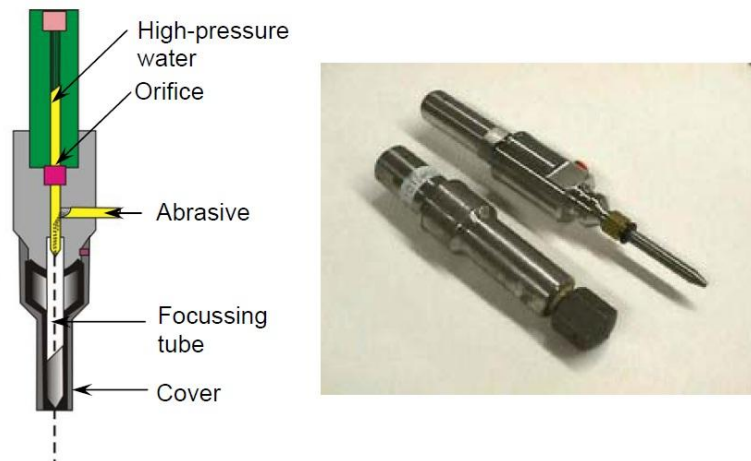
Schematic and photographic view of the cutting head⁵⁸
